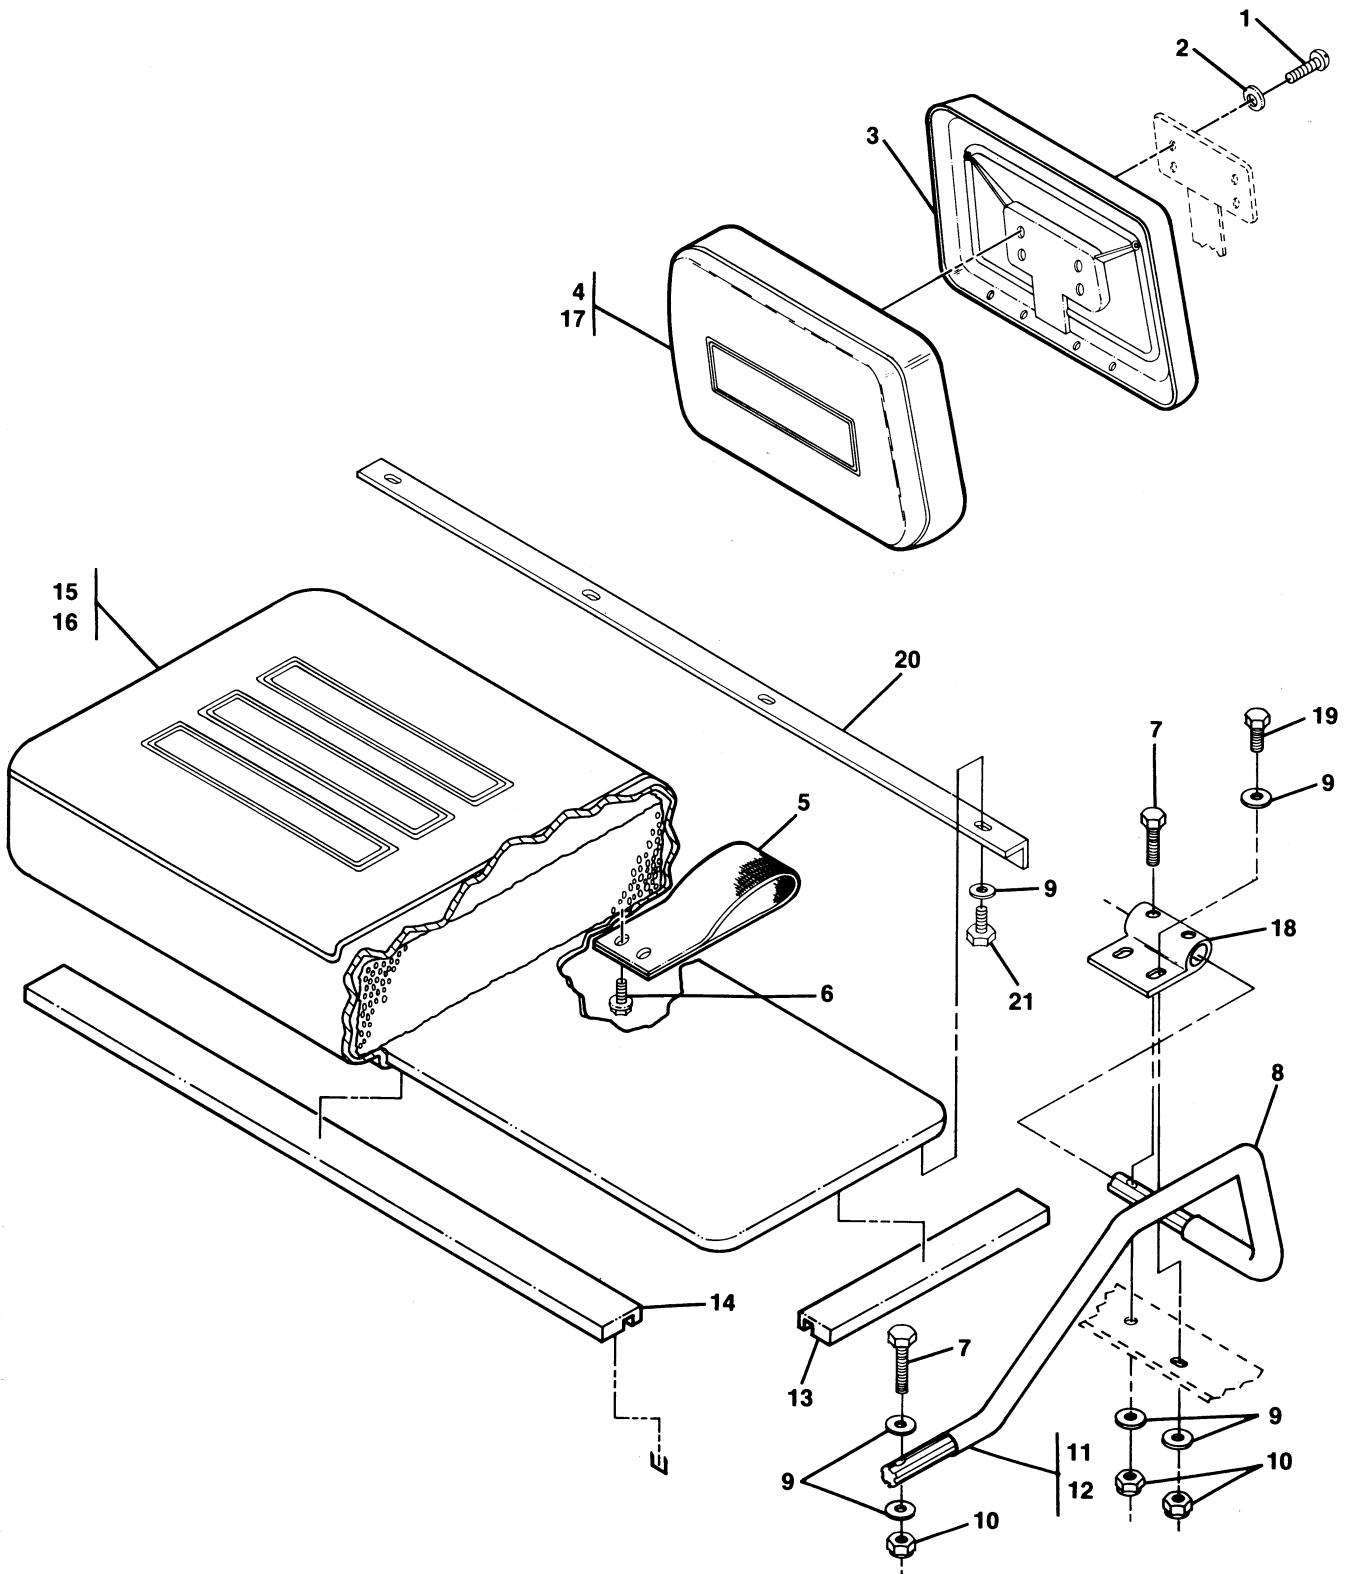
SEAT BACK & SEAT BOTTOM ASSEMBLY. SEE LIST 1-4.
